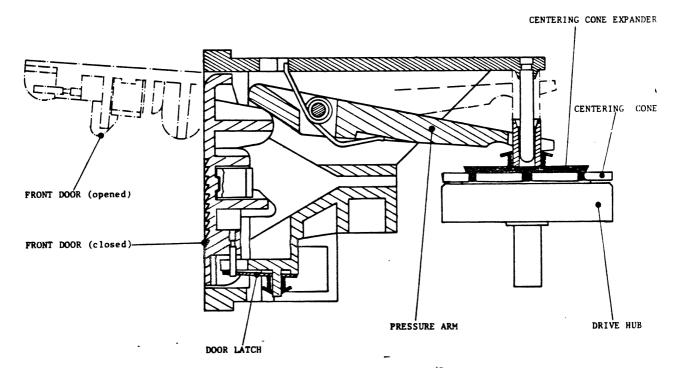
3 . SPINDLE AND FRONT DOOR MECHANISM
